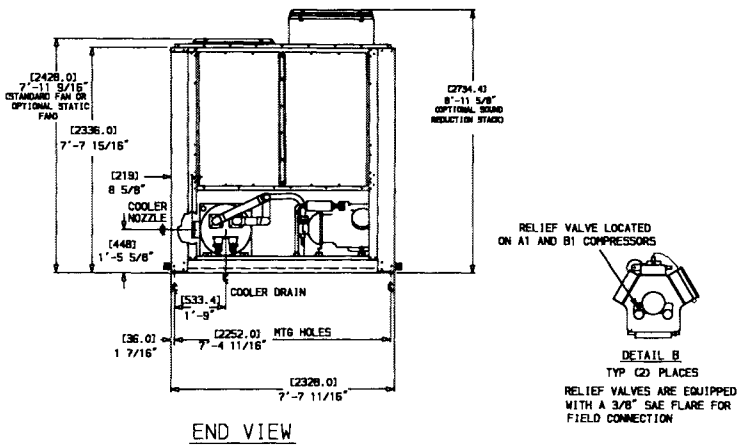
Dimensions; 30GT300,330 Complete Unit (Modules A and B Connected)
